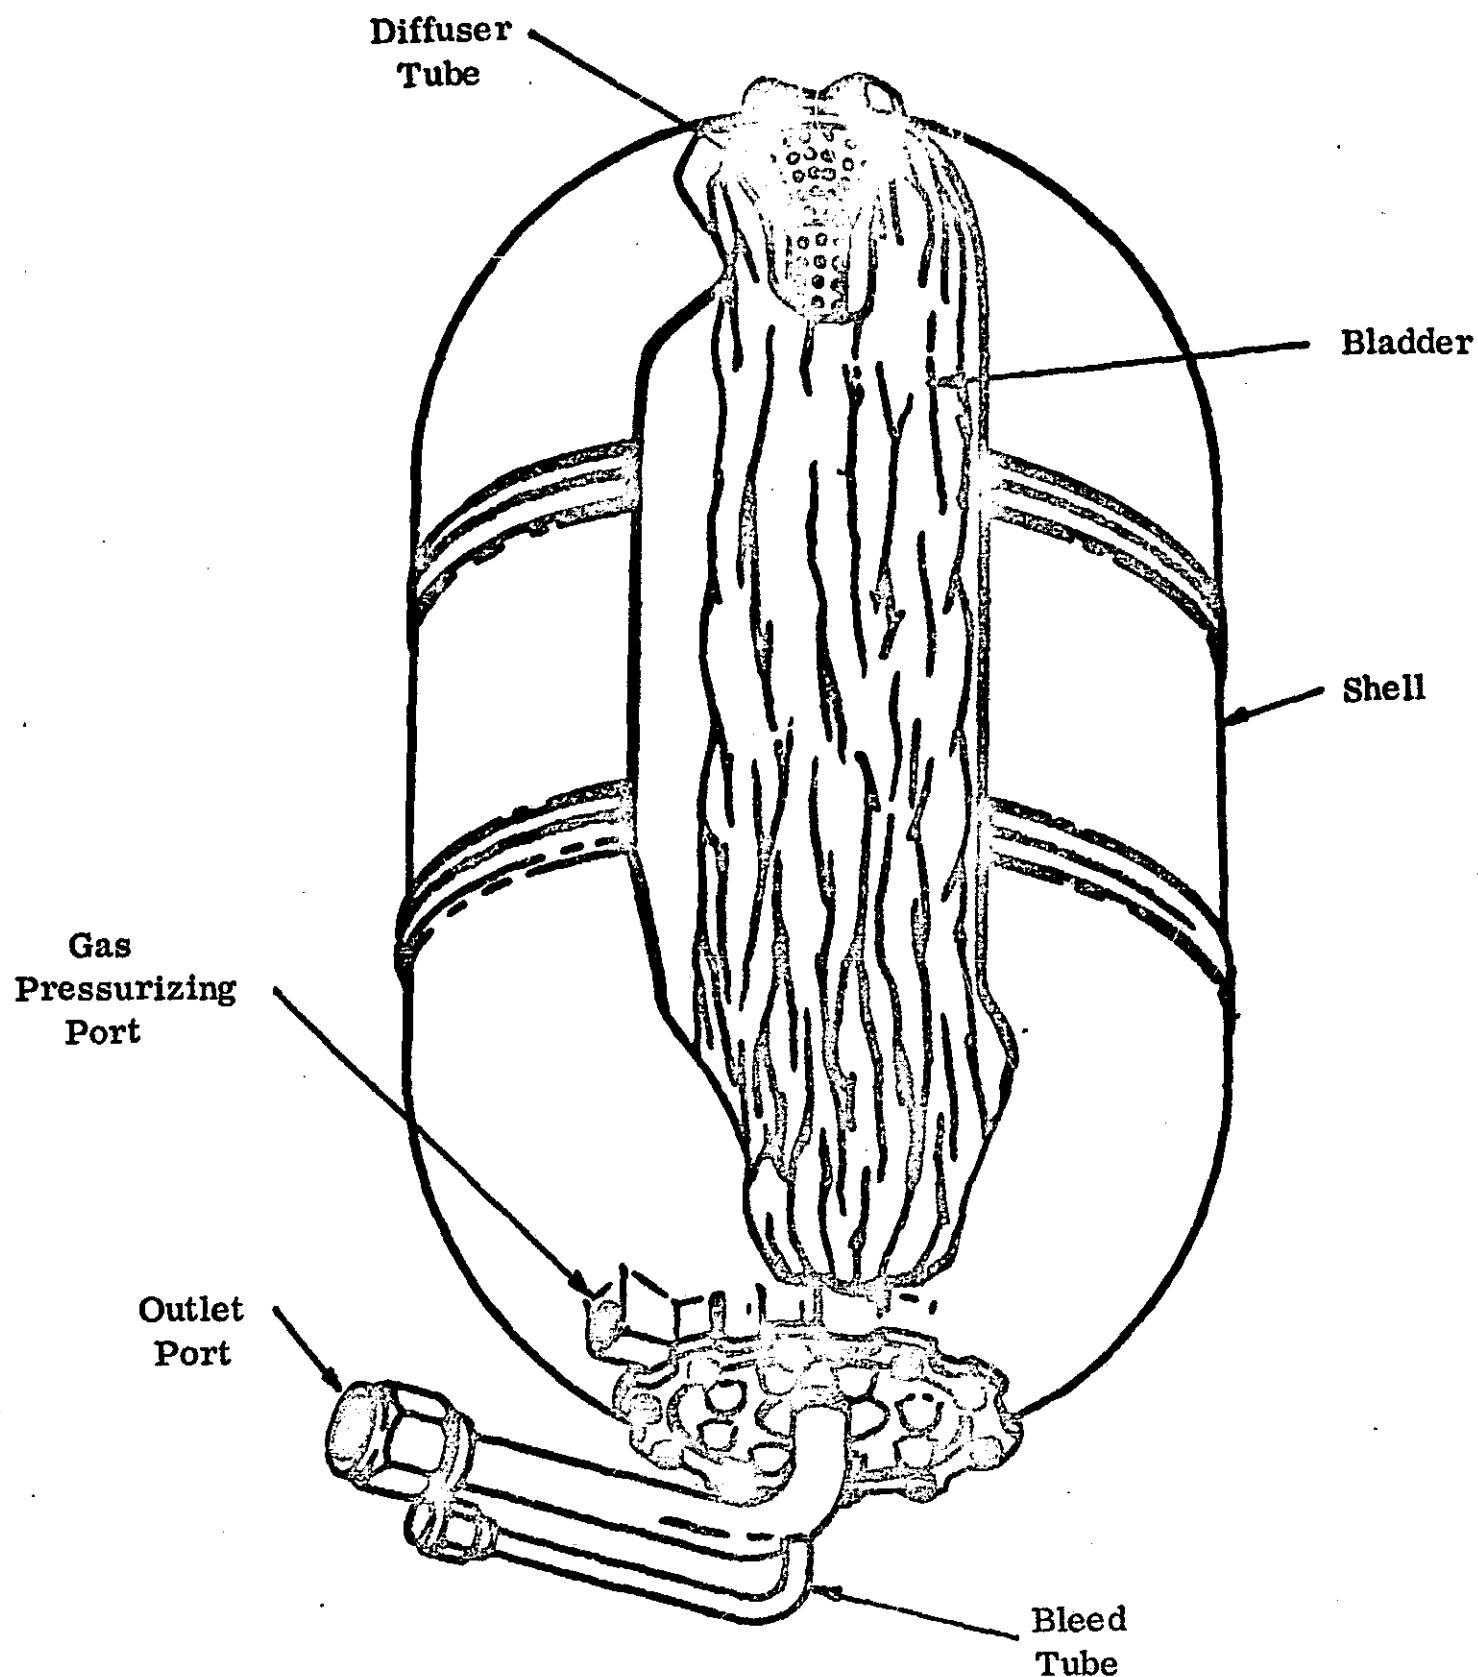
TYPICAL APOLLO TYPE TANK ASSEMBLY
